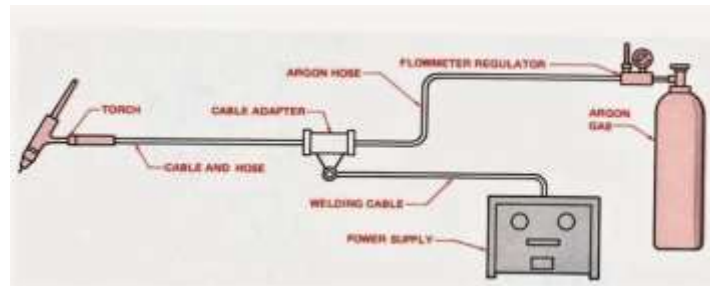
GTAW / TIG (Gas Tungsten Arc Welding) Welding Equipment.[6]
